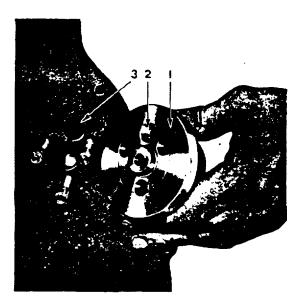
Idler Gear Hub Location. 1. Idler Gear Hub.
